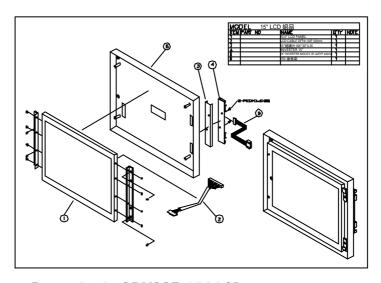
ODYSSE 150 LCD MODULE ASSEMBLY
